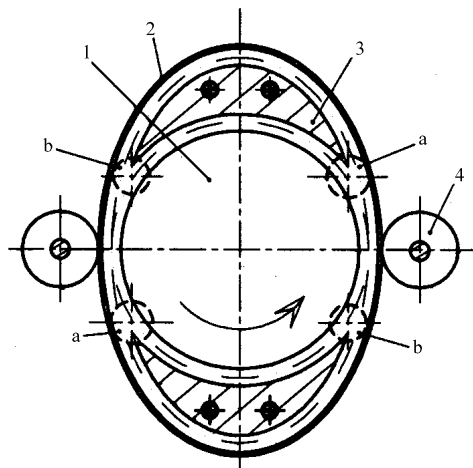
Principle diagram of flexspline gear pump: 1) Circular spline; 2) Flexspline; 3) Sealing block; 4) Wheel; a) Suction chamber; b) Extrusion chamber
